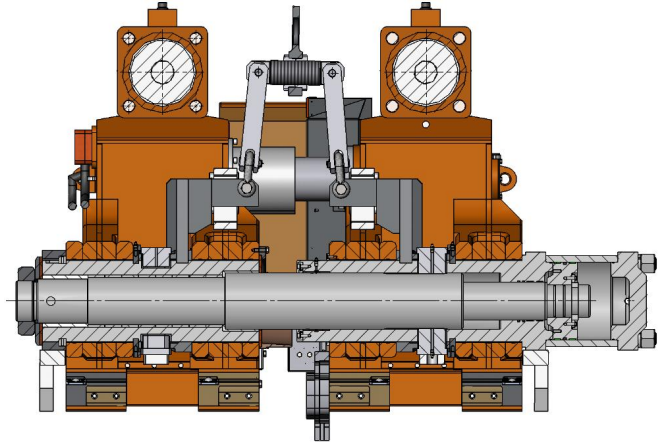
Longitudinal cross-section of the K1045 mobile machine for flash butt welding of rails
